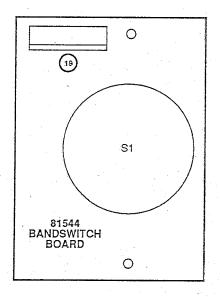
81544 BANDSWITCH BOARD COMPONENT LAYOUT
